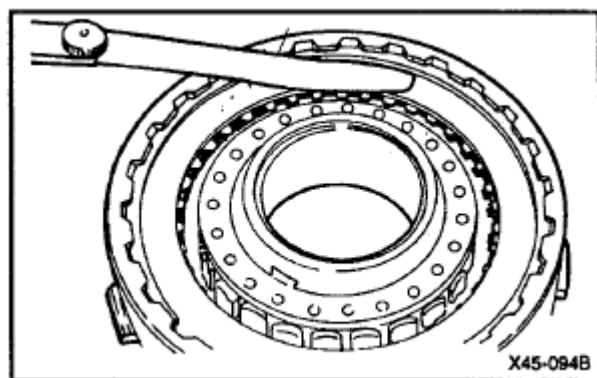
Checking Clearance Between Snap Ring & Clutch Reaction Plate
